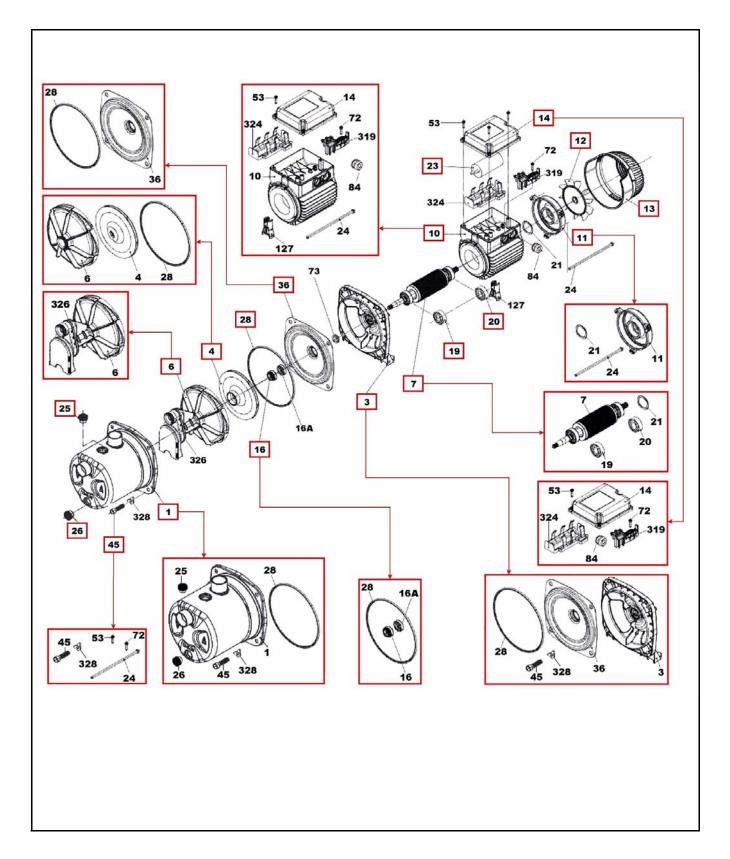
Diesel Exhaust Fluid Pump 8420 -Exploded View
